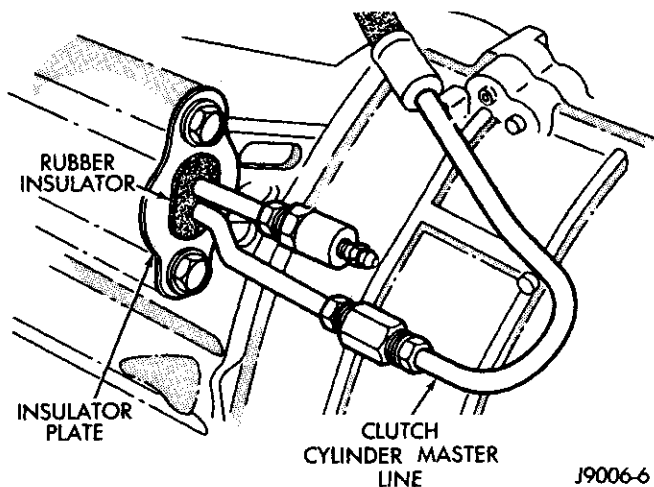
Insulator, Plate And Bleed Screw — 6-Cyl
